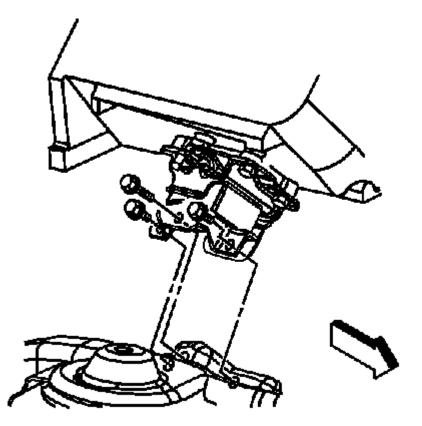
View Of Right Side (Left Side Similar) Engine Mount To Engine Mount Bracket Bolts Courtesy of GENERAL MOTORS CORP.
